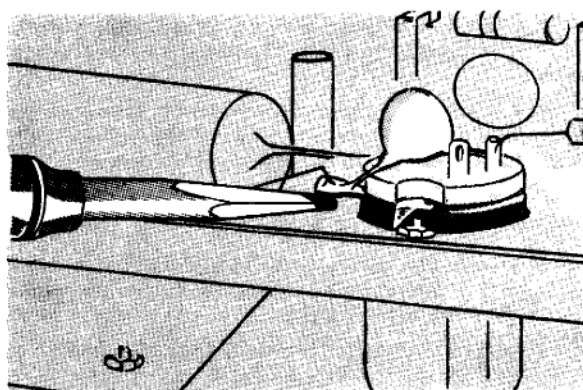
Soldering to a terminal. Note the slight fillet of solder formed around the wire.
